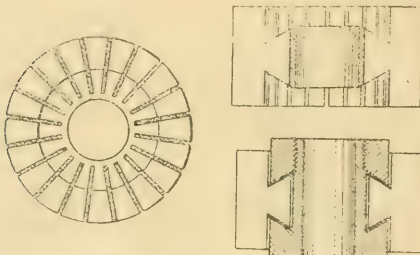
SECTION OF COMMUTATOR BLANK, INSULATING MATERIAL IN PLACE, AND SECTION OF COMPLETED COMMUTATOR.
